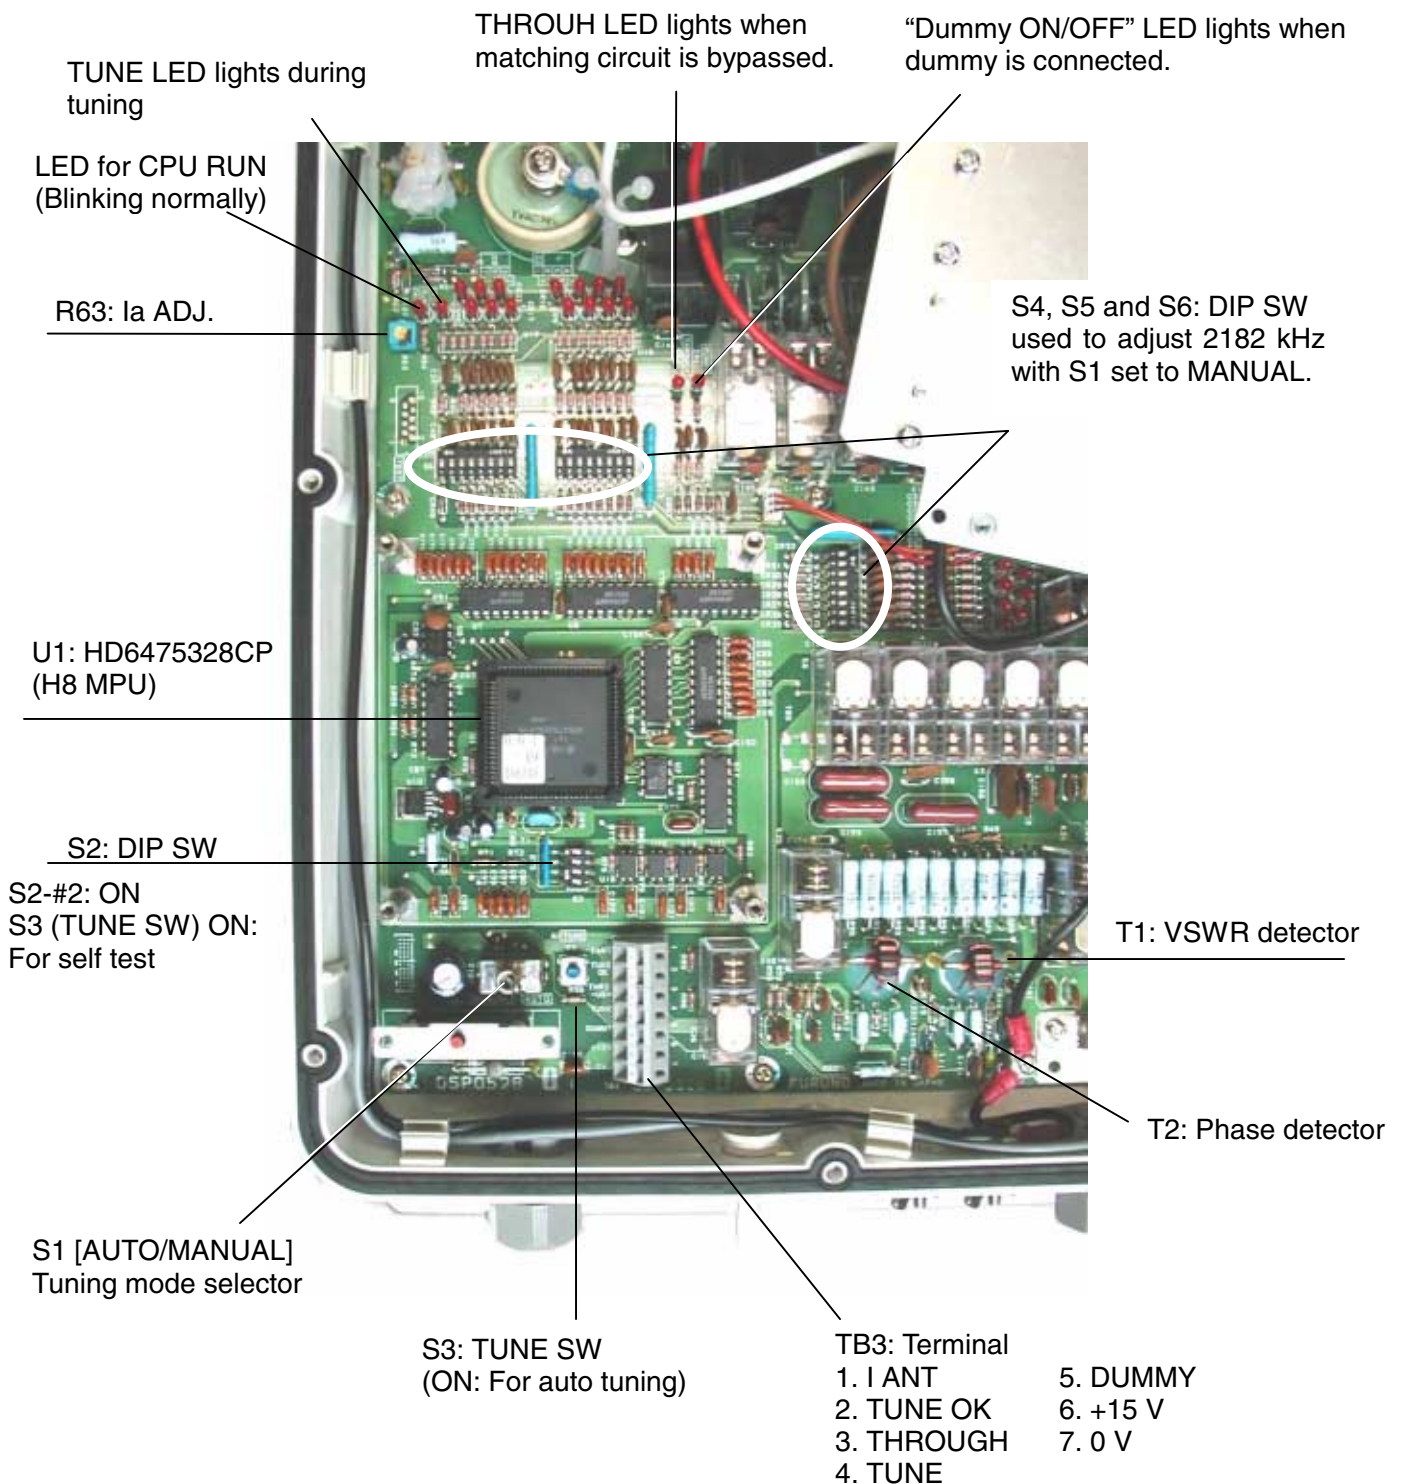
AT-1560-15/25 with dummy board removed
